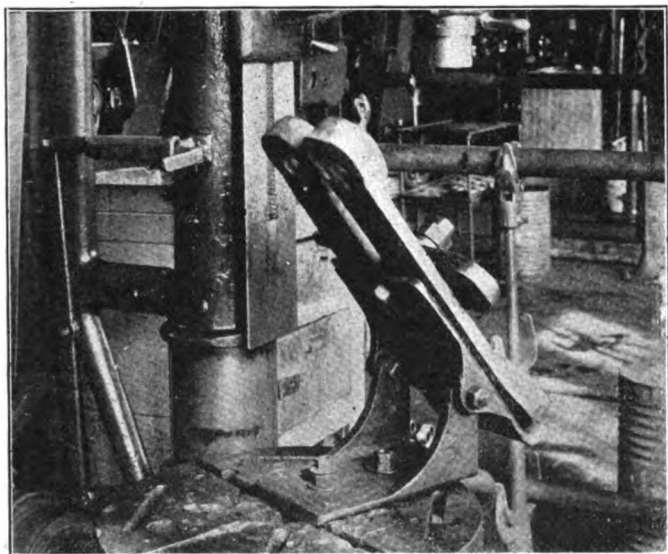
Convenient drill press jig for drilling oil holes in spring hangers
